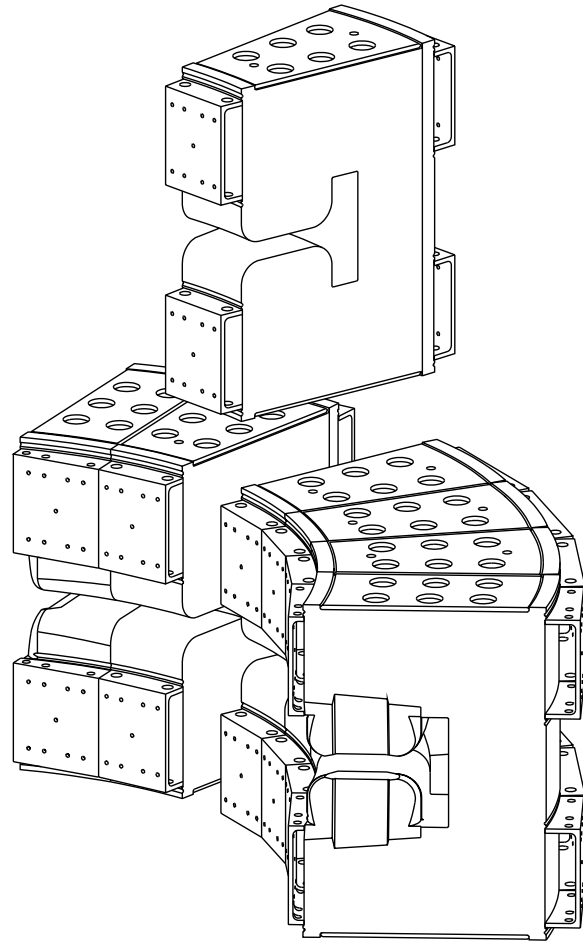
Isometric plot of CIS dipole magnet assembly. For better viewing one wedge is moved up and the coil is removed.
